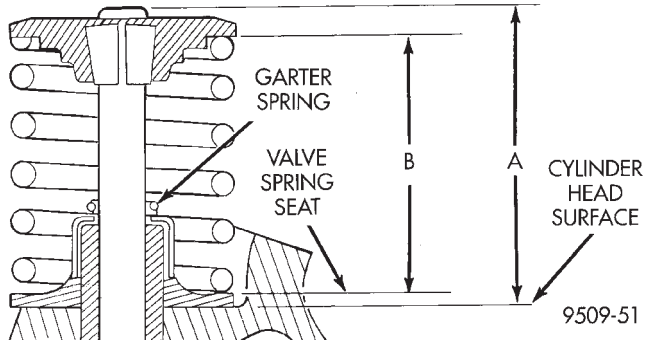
Checking Spring Installed Height and Valve Tip Height Dimensions
